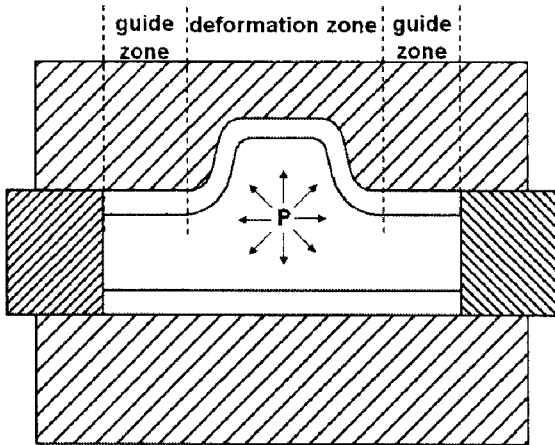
Schematic drawing of friction zones in tube hydroforming
